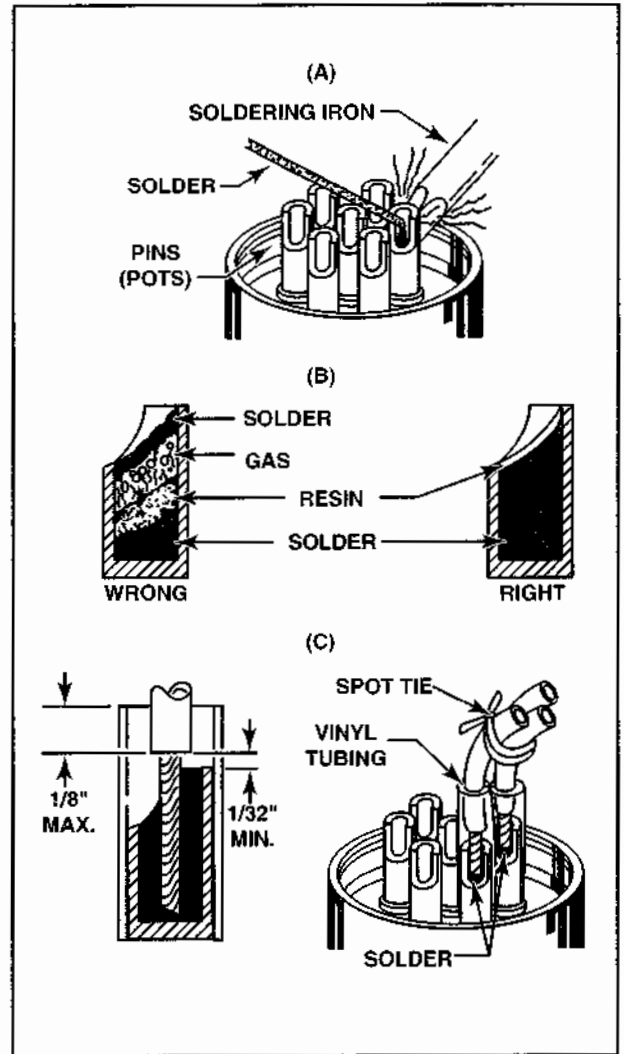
(A) After the wires are tinned, fill a solder pot with solder. (B) Ensure that the pot is sufficiently heated before adding solder. Otherwise, resin could become trapped in the solder, producing a weak connection. (C) After installation, ensure that at least 1/32-inch clearance exists between the wire insulation and the top of the solder joint. Additional insulation, such as vinyl tubing, should be slipped over each connection and secured.
